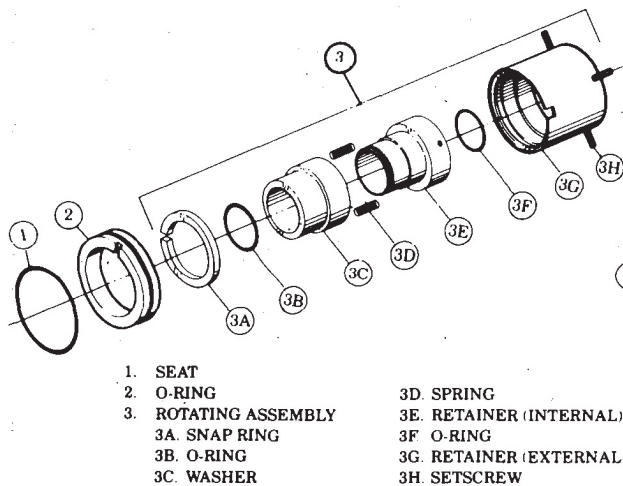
Crane Type 8B3 Mechanical Seal.
